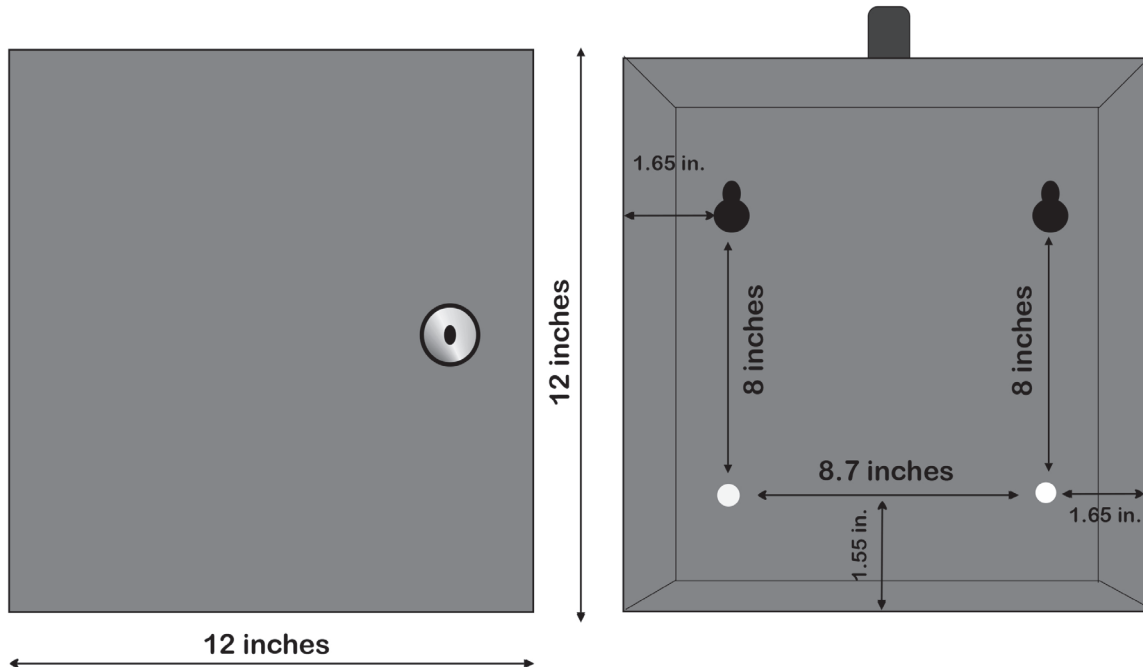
Inside & Outside Mounting Dimensions for the 4555
